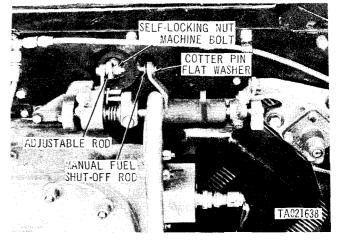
Disconnecting or connecting manual fuel shut-off rod and adjustable throttle rod.
